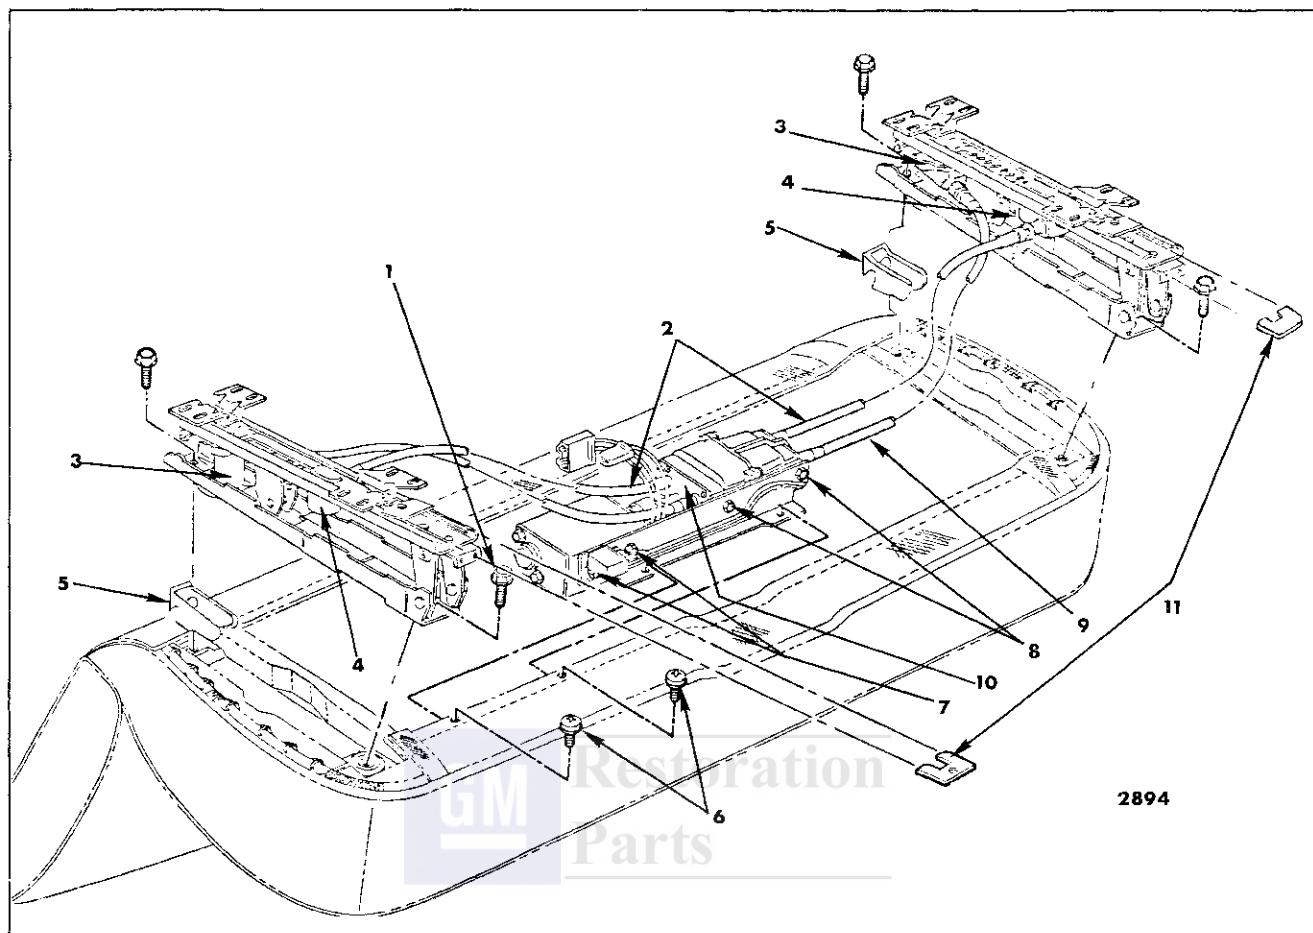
Front Seat Assembly — Four-Way Tilt — Buick "B, C & E" Styles
